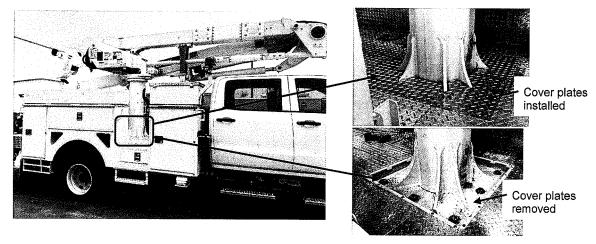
Area of unit to inspect pedestal to sub-base mounting bolts
